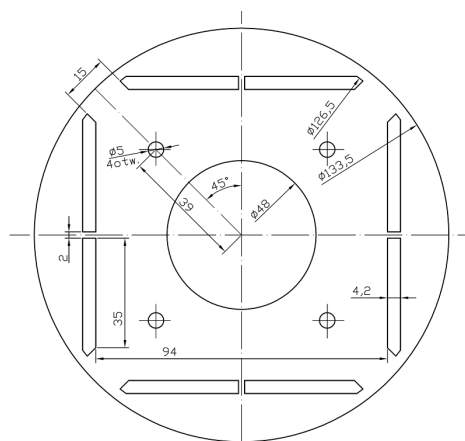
Dimensions of rotor core for the motor IPMSg 132 S4 PMSM
